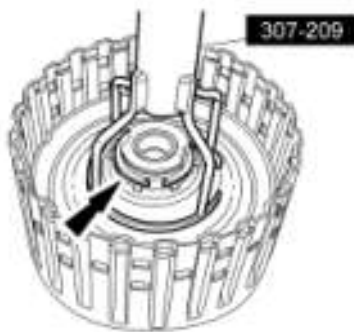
Removing Overdrive Clutch Balance Piston Retaining Ring Using Special Tool (307-209) & A Press
